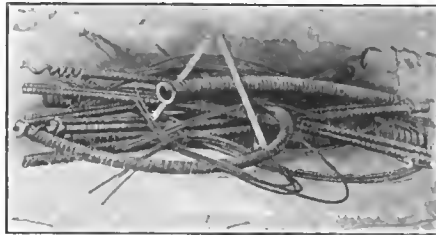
Early Process in the Manufacture of Hyatt "High Duty" Roller Bearings
